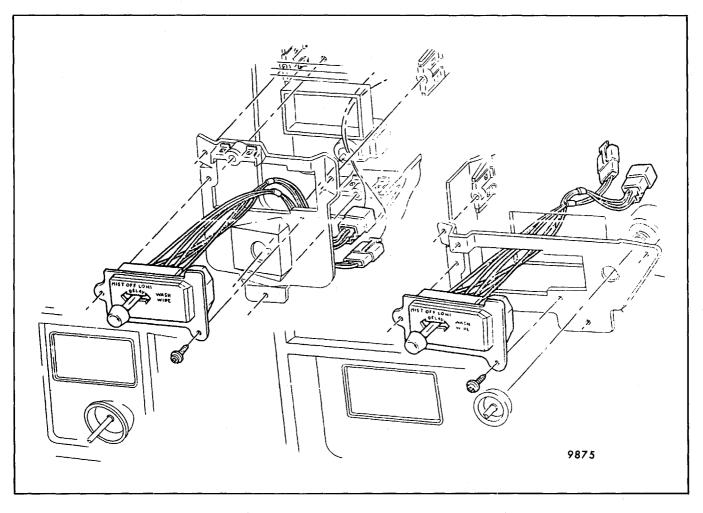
Windshield Wiper Installation - Chevrolet A Styles - Pulse Type
